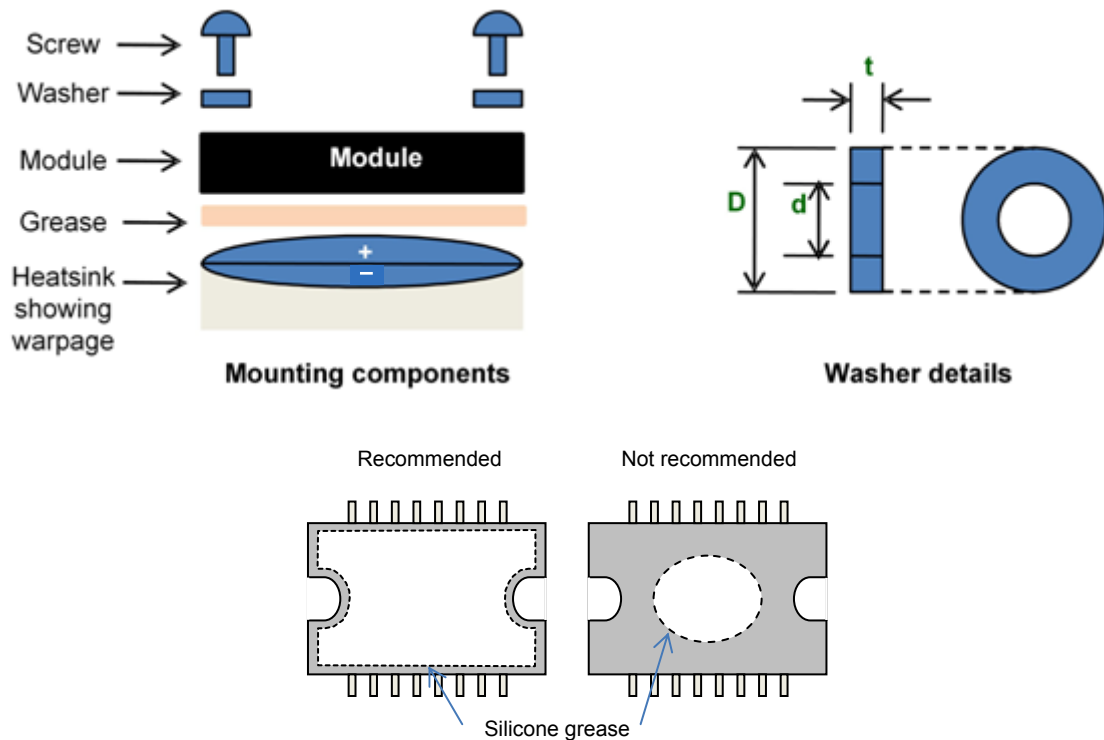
Module Mounting details: components; washer drawing; need for even spreading of thermal grease
